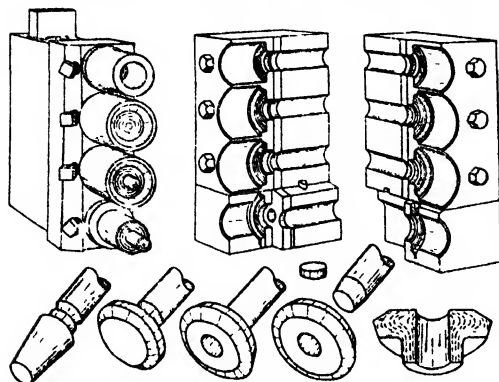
Inserted dies and tools for upsetting gear blank with a final combined shearing and punching operation with progressive forging steps and section showing looping fiber arrangement of completed forging.
